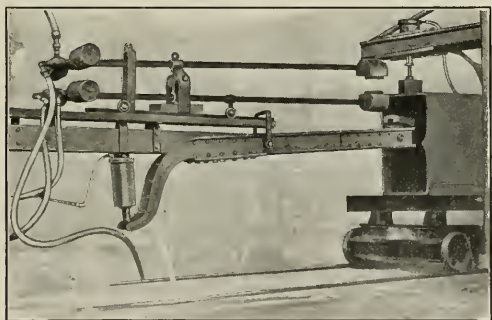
BLAW-KNOX HEATING AND HAMMERING MACHINE FOR HAMMER WELDING
